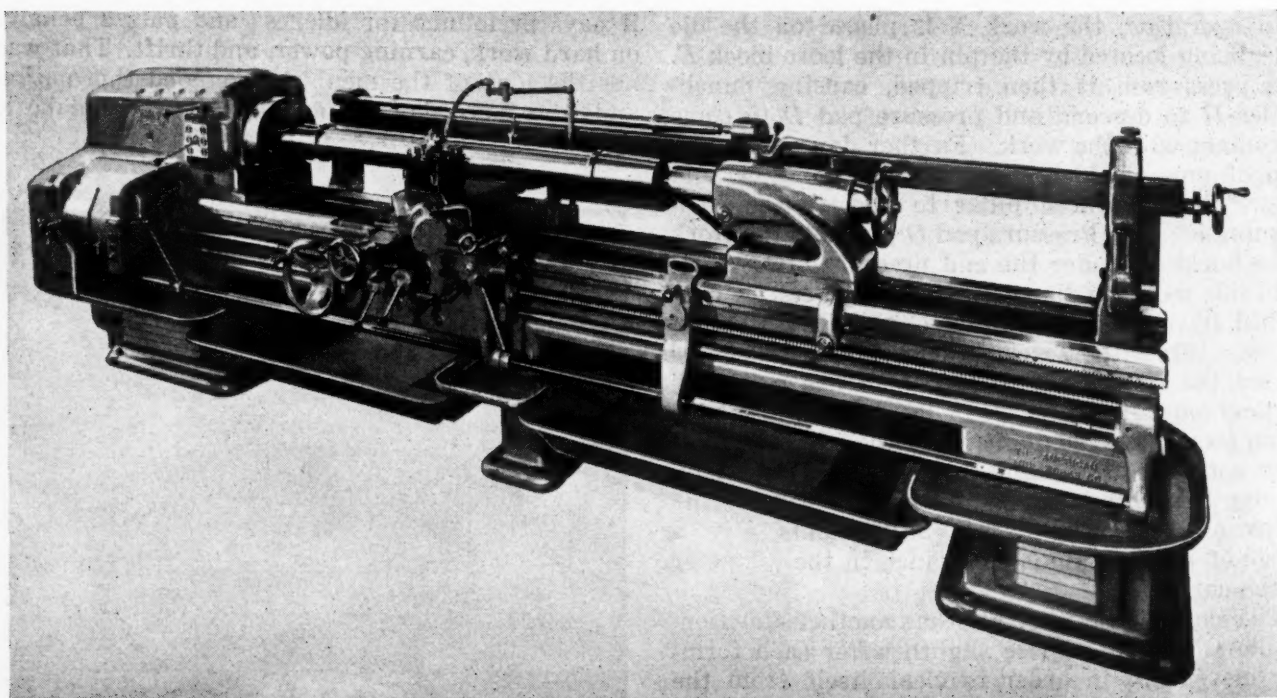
Hydraulically Operated Duplicating Lathe Brought out by the American Tool Works Co.
